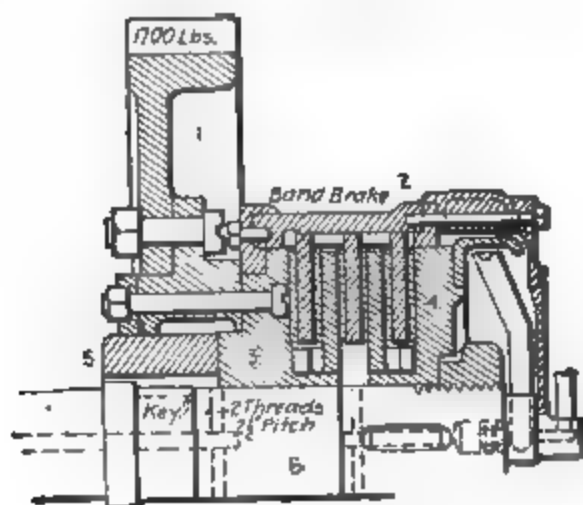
Sellers Type Disc Friction Brake for Boat Crane
